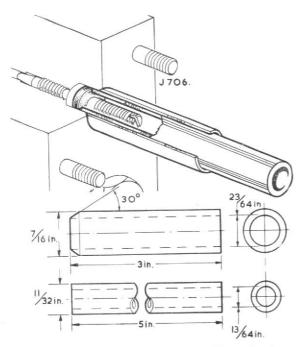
Locally made tool for assembling the slow-running-adjusting-screw seal and distance piece.
